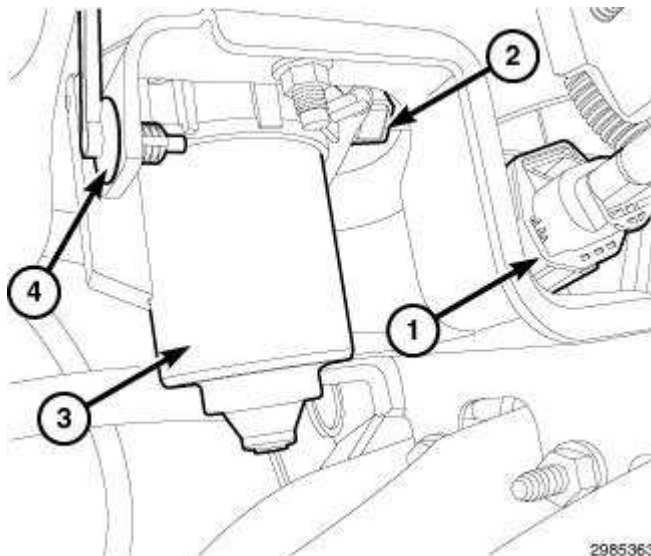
Electrical Connector, Harness Connector, Hose & Vacuum Pump
